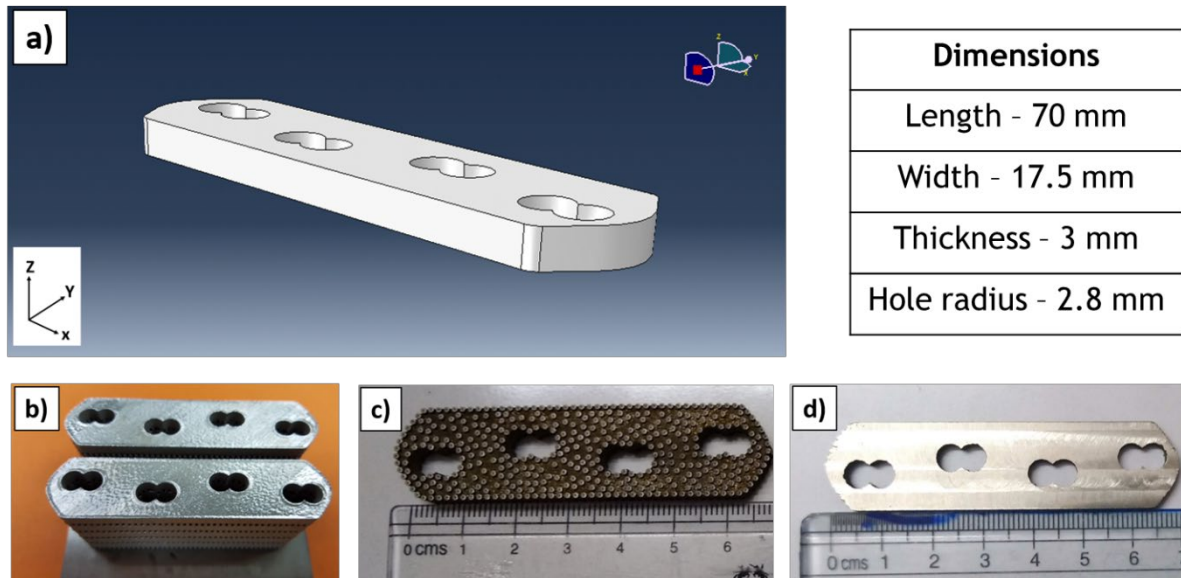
Additively manufactured bone plate: (a) CAD model (b) assembly of as-prepared plates (c) after stress relieving (d) after milling
